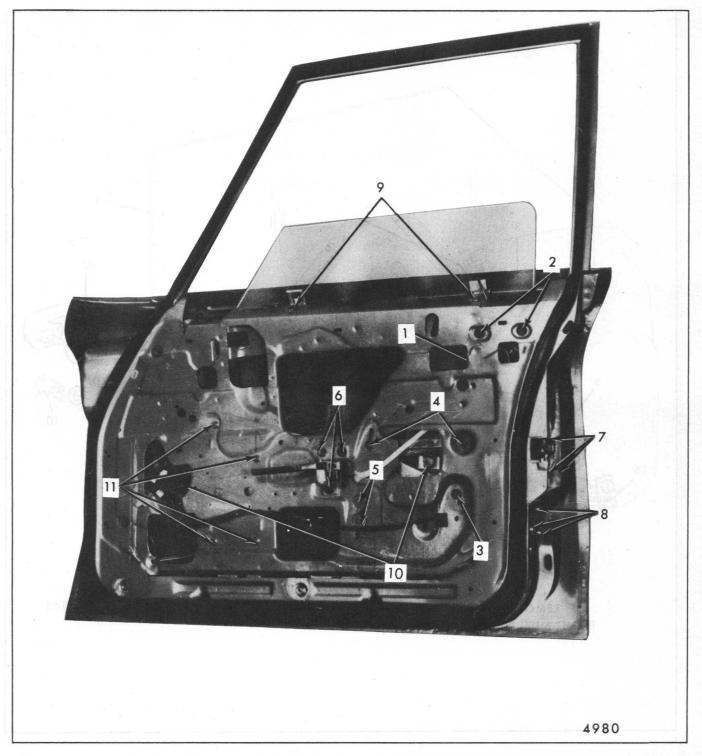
Front Door Hardware Attachments - "B-35, 45, 69" styles
